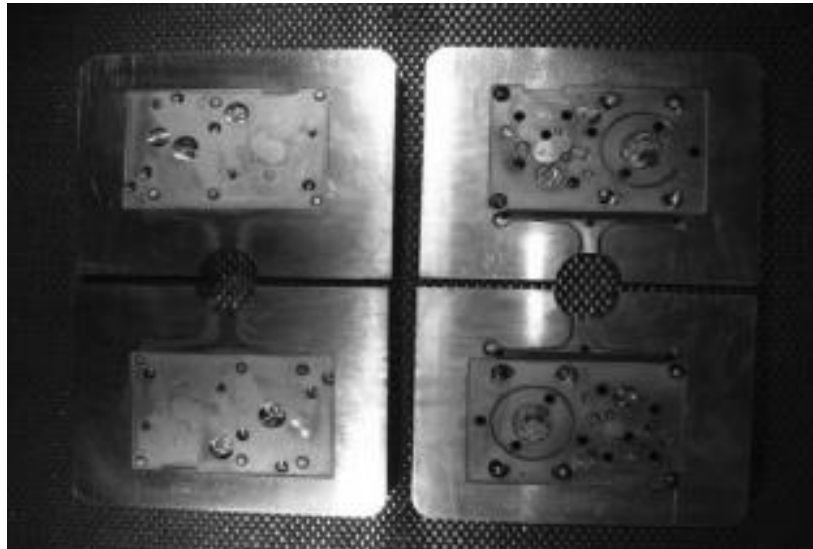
Die casting mold manufactured with TOOLOX 44 to inject Zamak [40].
